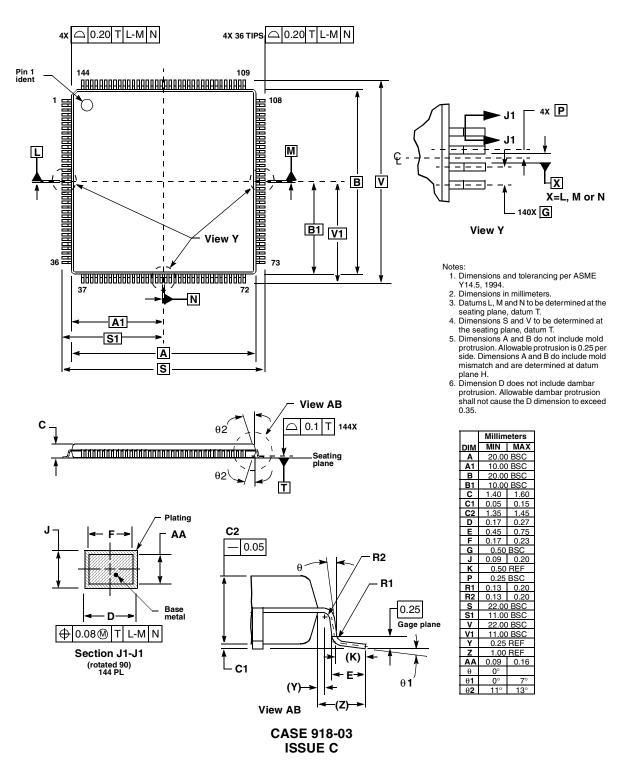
DSP56309 Mechanical Information, 144-pin TQFP Package
